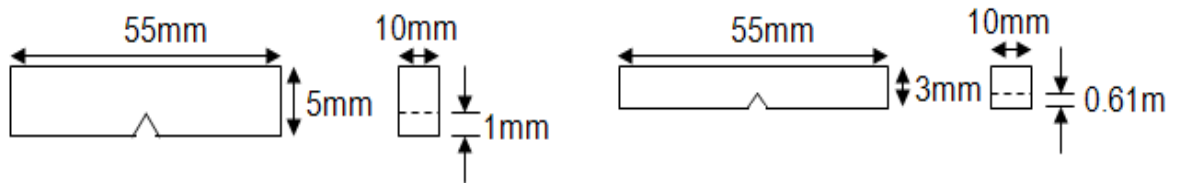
The Sub-Size specimen Dimensions for Charpy Test [20]
